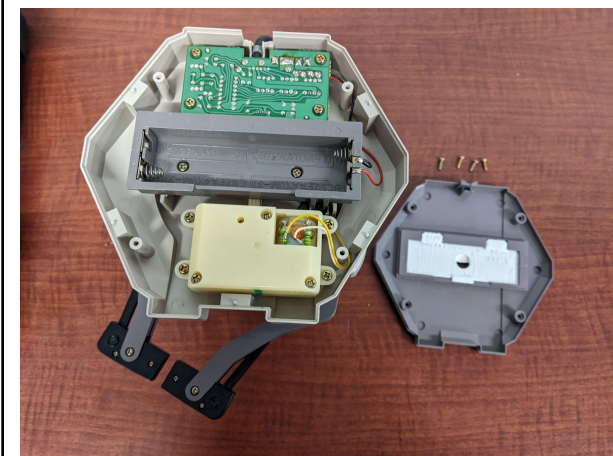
Diagram of Deconstruction Plan of R.O.B.
